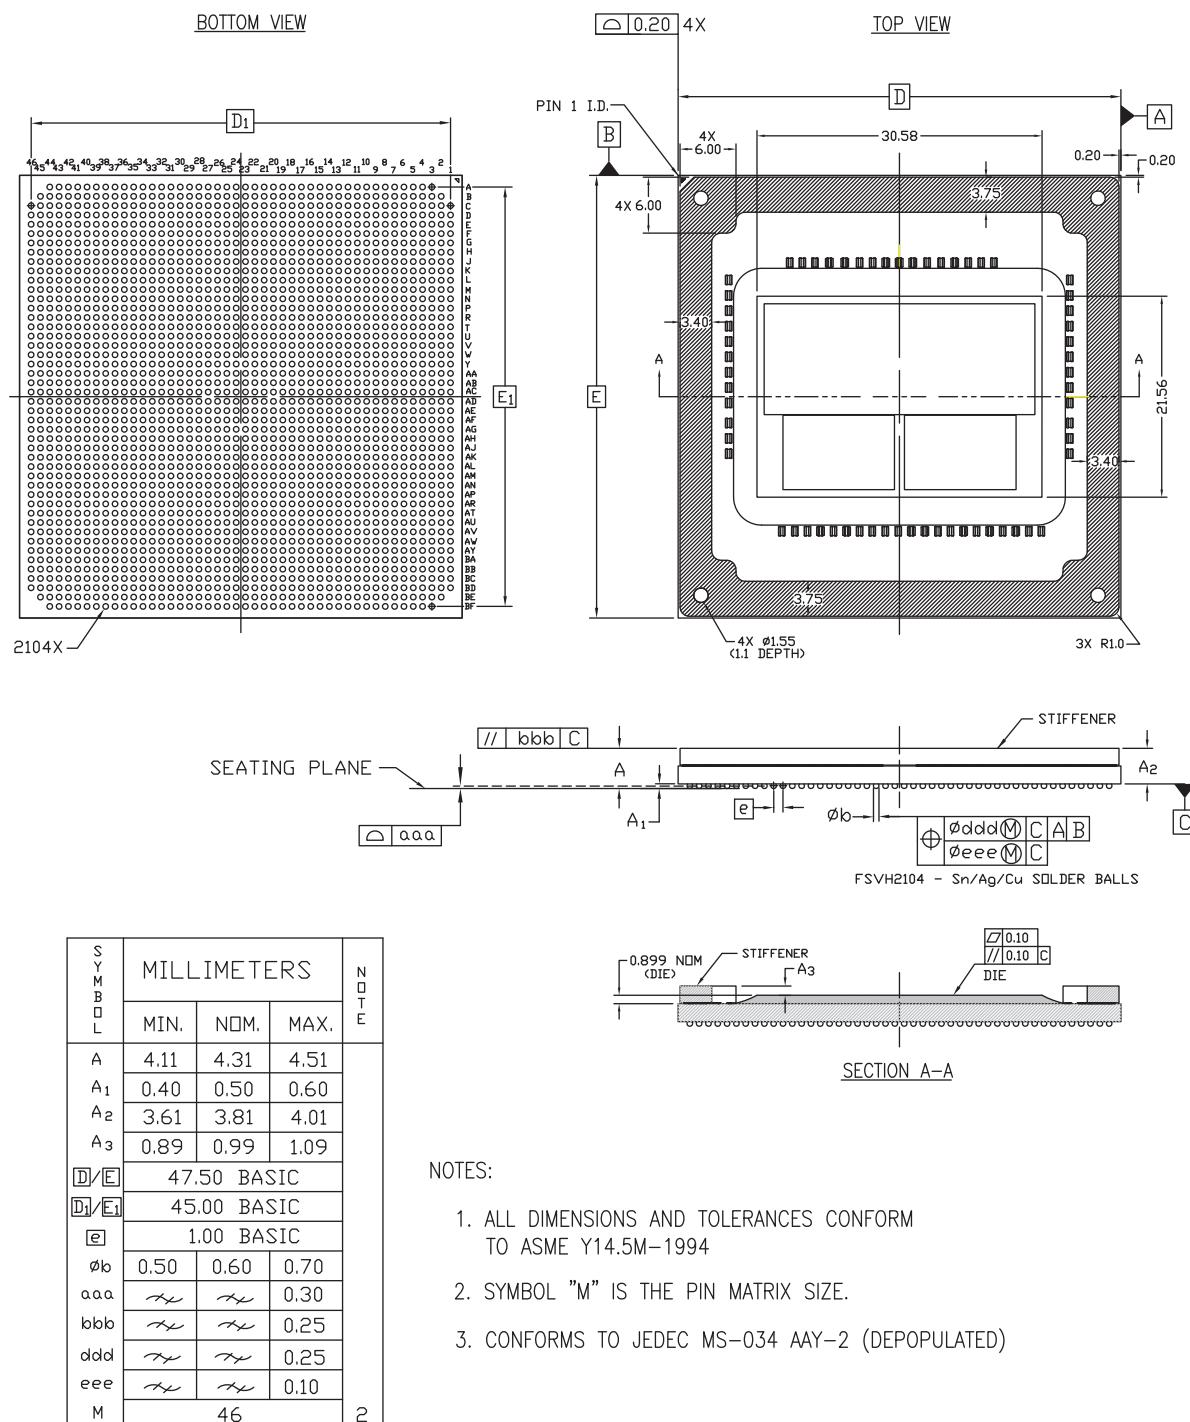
Package Dimensions for FSVH2104 (XCVU33P)
